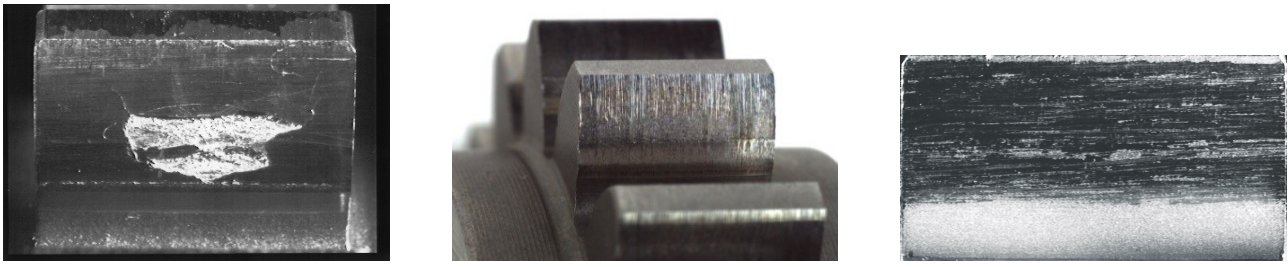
Samples of gear flank damage, left to right: pitting, wear, micropitting
